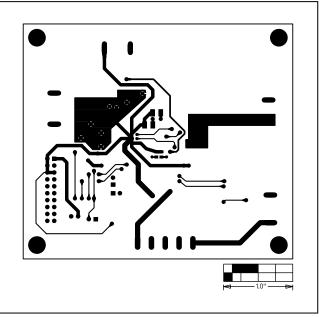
MAX1645B EV Kit PC Board Layout—Solder Side
